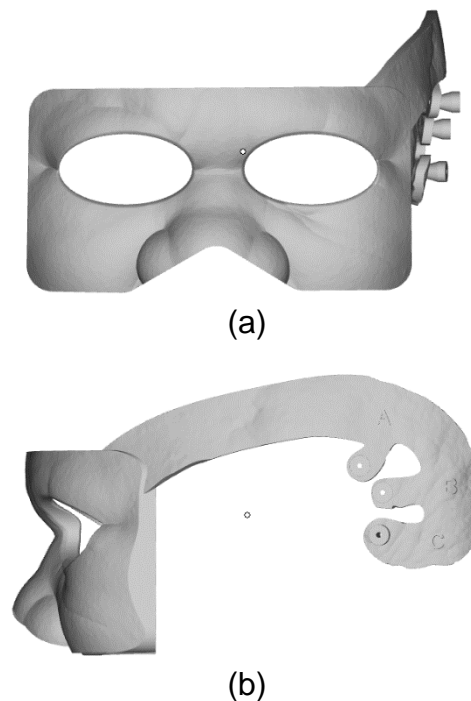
Case study 1 auricular prosthesis drill guide (a) front view and (b) side view
